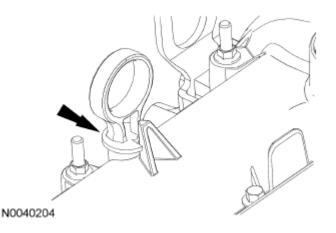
Locating Block Heater Courtesy of FORD MOTOR CO.
